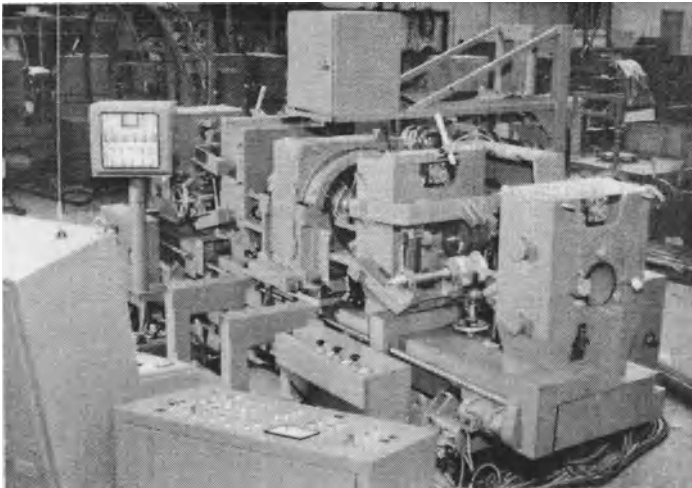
Rotating probe-testing installation for tubes between 20 and 180 mm diameter (type ROT 180, design Krautkrämer)
